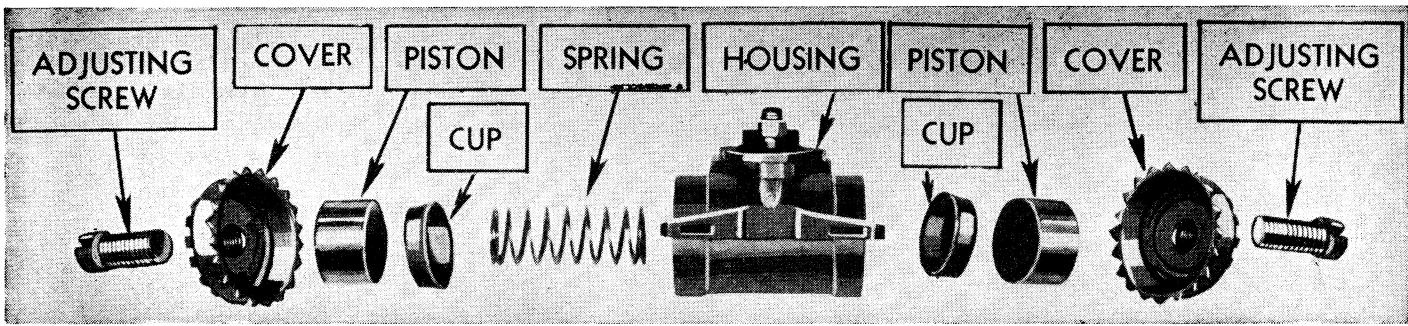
Exploded view of wheel cylinder with metal end covers and adjusting screws
